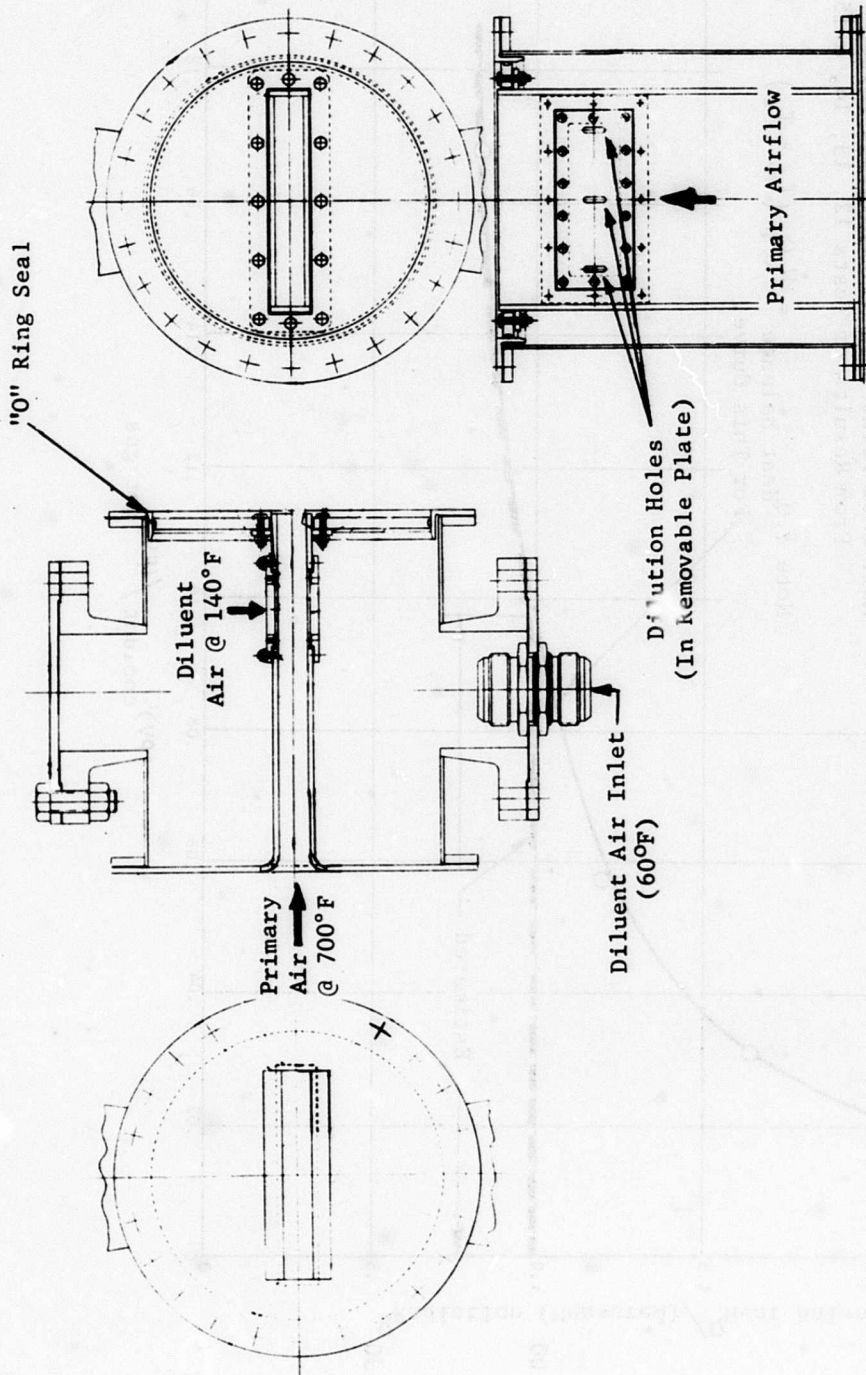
Rectangular Mixing Zone Duct Installed in Cross-Section Duct.
